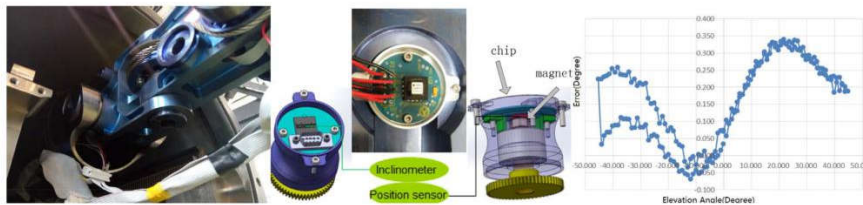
(a) Joint structure, (b) Mechanical installation of ASS047D, (c) Elevation Angle Error.
